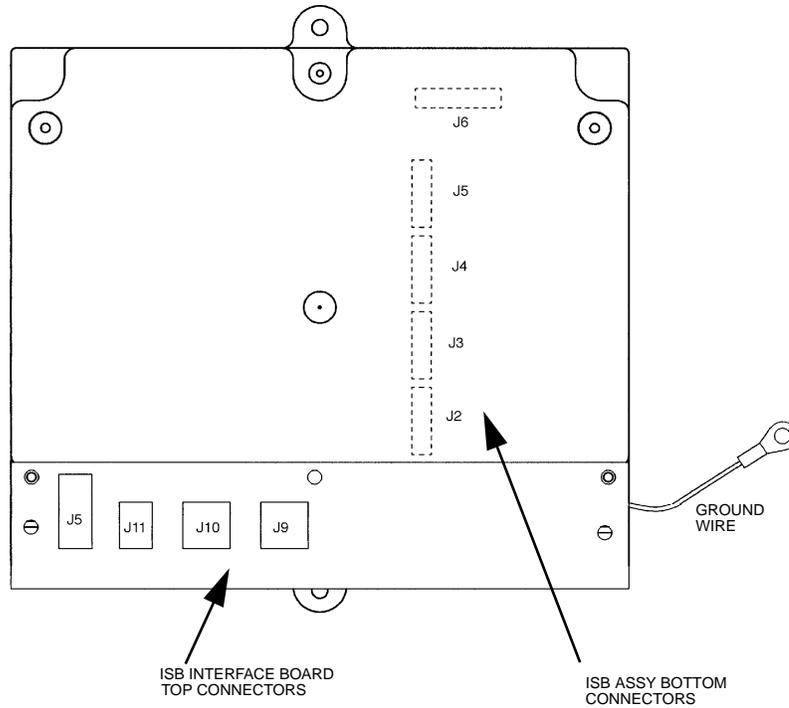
INTRINSIC SAFE BARRIER ASSEMBLY. *The ISB ground connection shown must be made directly to the dispenser chassis.
